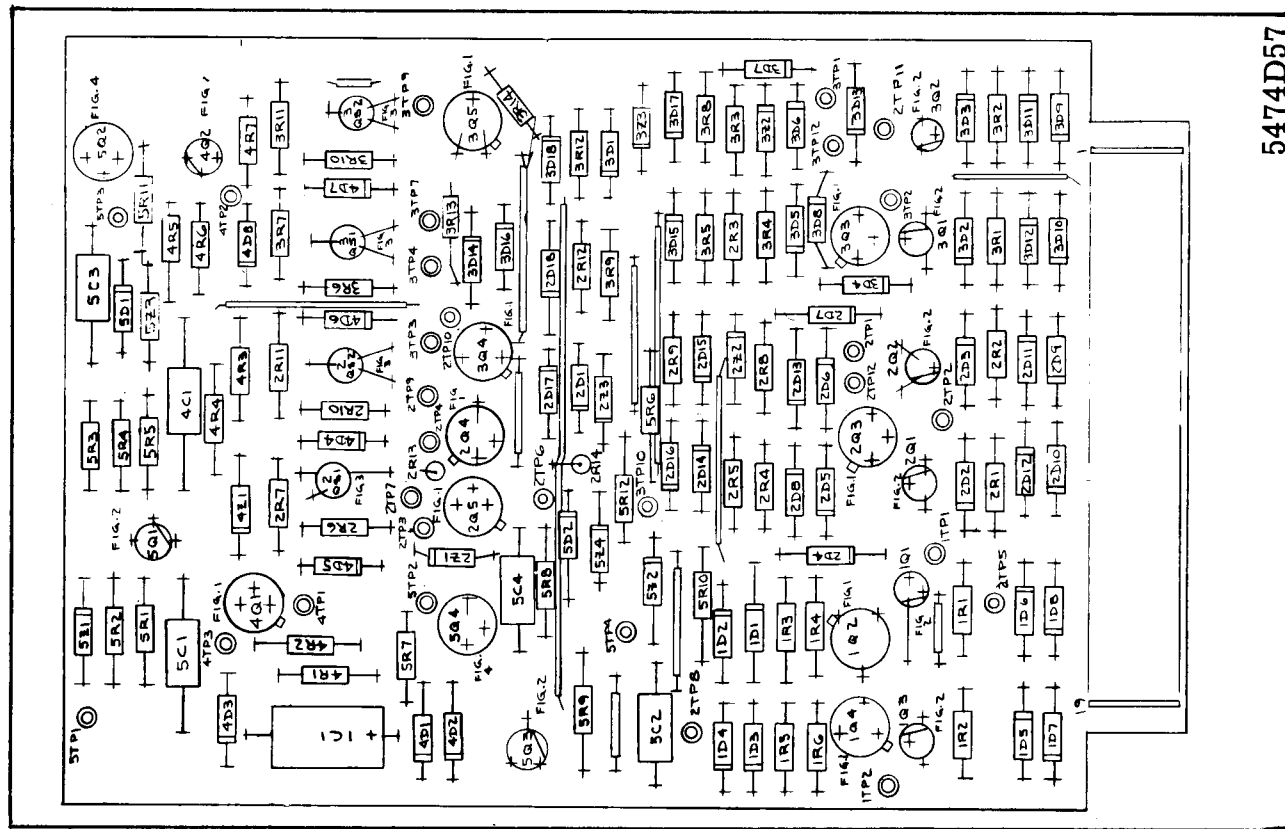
Printed Circuit Board Assembly for Type SP Relay with "AND" Supervised Dual Output.
